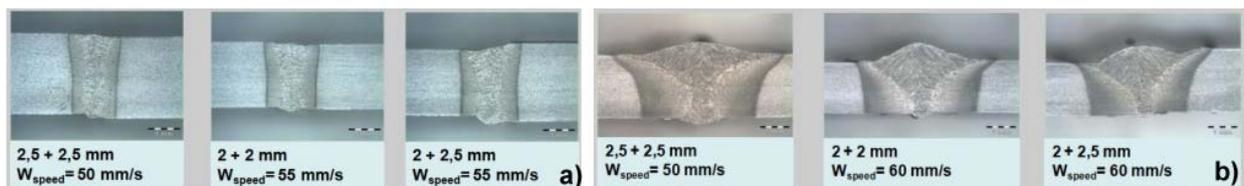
LW joints of DP 1000 steel sheets at CLUPM: *a)* without filler material, using LW in keyhole mode; *b)* LHW joints of DP 1000 steel sheets with filler material using GMAW + LW in keyhole mode.
